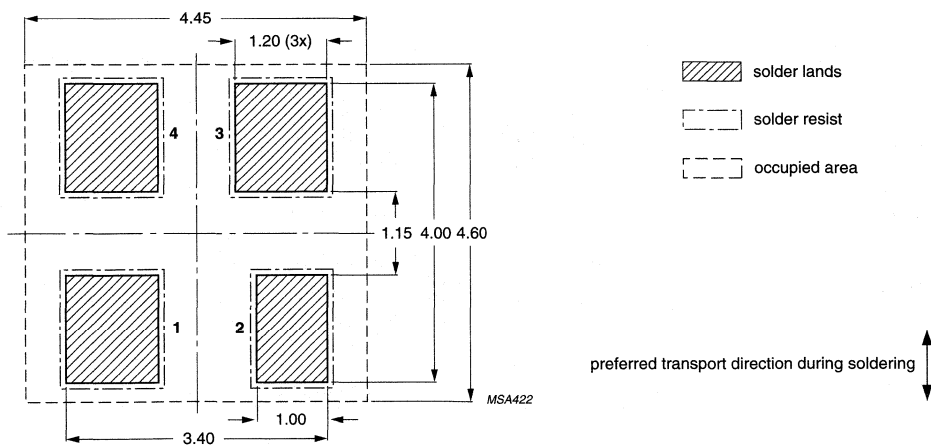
Wave soldering footprint for SOT143 (footprint for SOT143R is mirror image).
